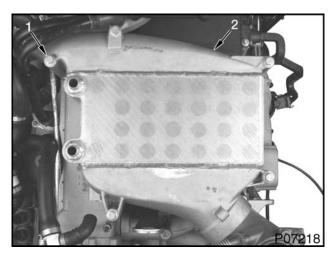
High Pressure Charge Air Cooler (HPCAC)
